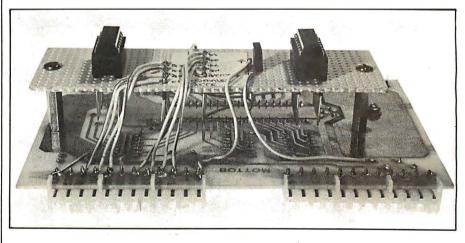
Shown here is the method of mounting the cycle-counter circuit board.
